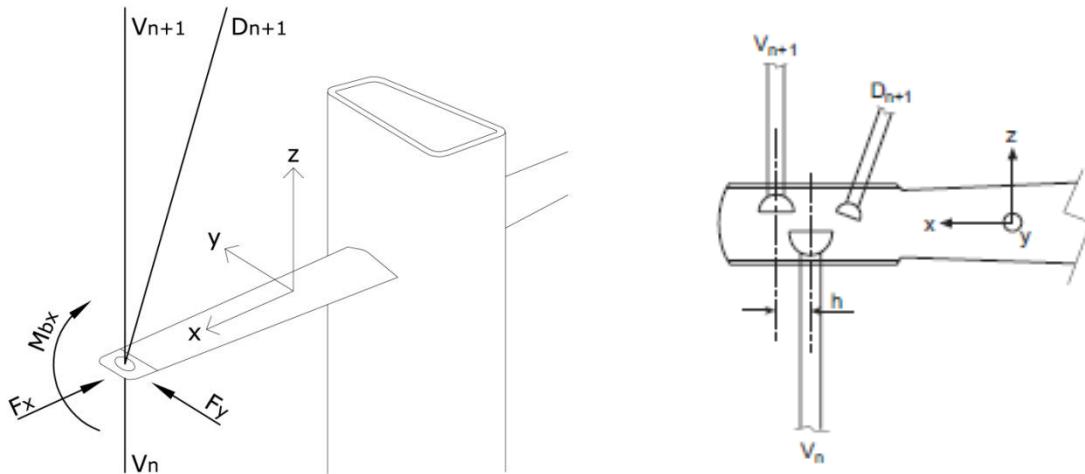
global view of spreader fitting (left) and spreader tip detail (right)
